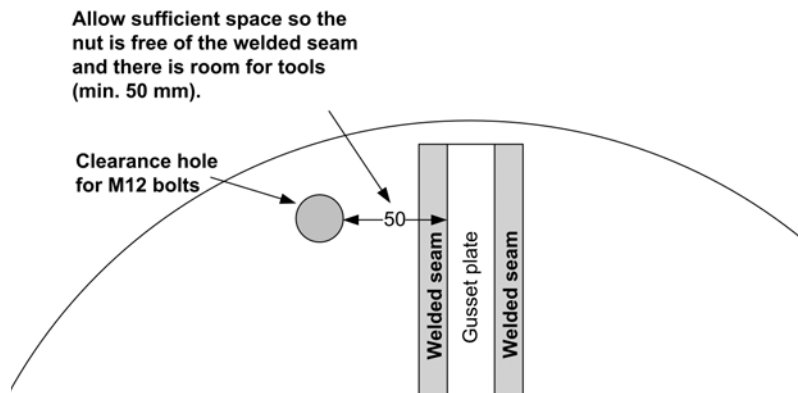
ADU mast flange, distance to the welded seam
